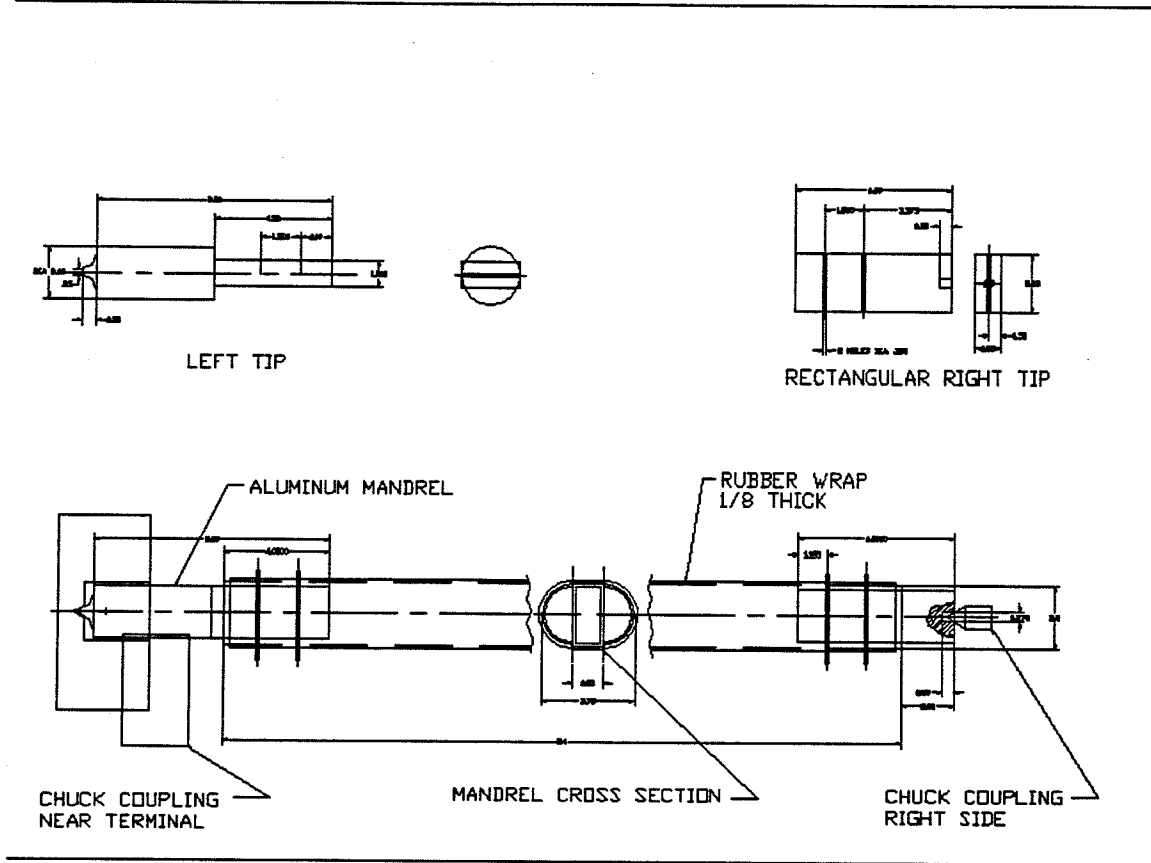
Engineering drawing of the inner cell mandrel and extension blocks.
